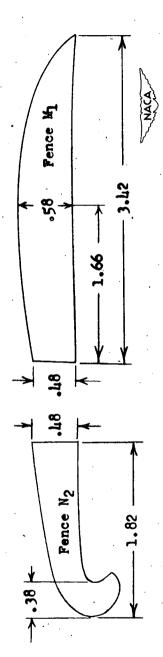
Drawing of model used in the investigation. All dimensions given in inches.
